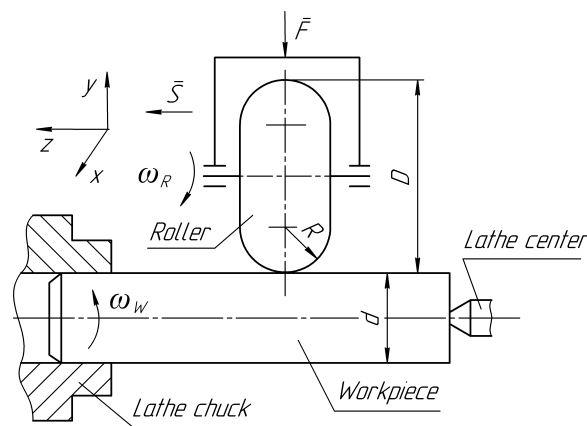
Schematic diagram of hardening of a cylindrical billet by a torus roller: R – profile radius of the roller; D – roller diameter; d – the outer diameter of the hardened workpiece; \bar{F} – force of deformation; \bar{S} – axial feed of roller; ω_w – angular speed of workpiece rotation; ω_R – angular speed of roller rotation.
